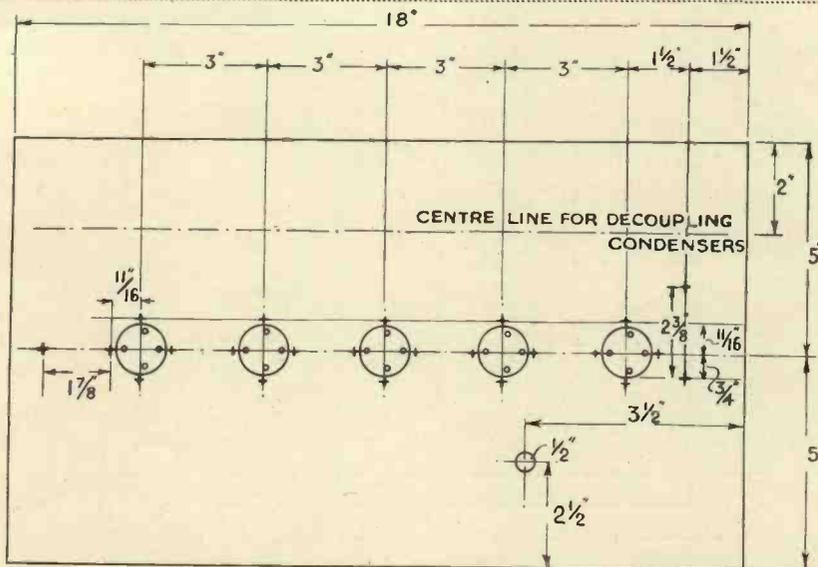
A dimensioned drawing of the layout of the baseboard.
